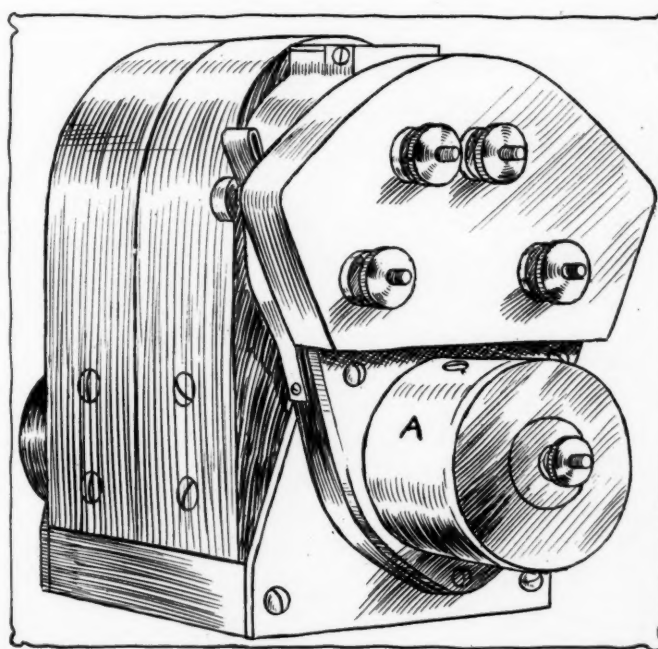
Exterior of the fixed spark magneto showing cap A to be removed
